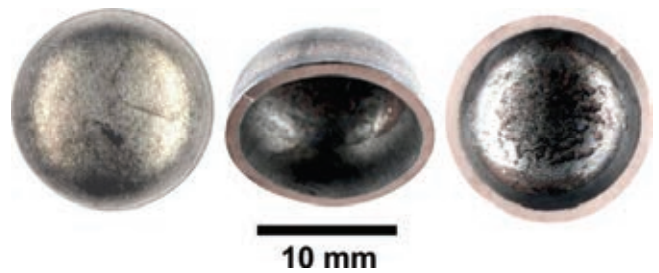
Quality of the deep drawing process. Left: the top surface is extremely smooth. Middle: view inside the thimble. Right: the inner surface is also smooth.
